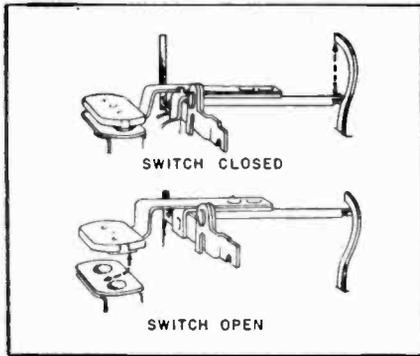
Typical toaster switch contacts are illustrated. This part is often a cause of toaster operating failure. The part could be bent, contact points themselves can be burnt, preventing completion of the circuit.
